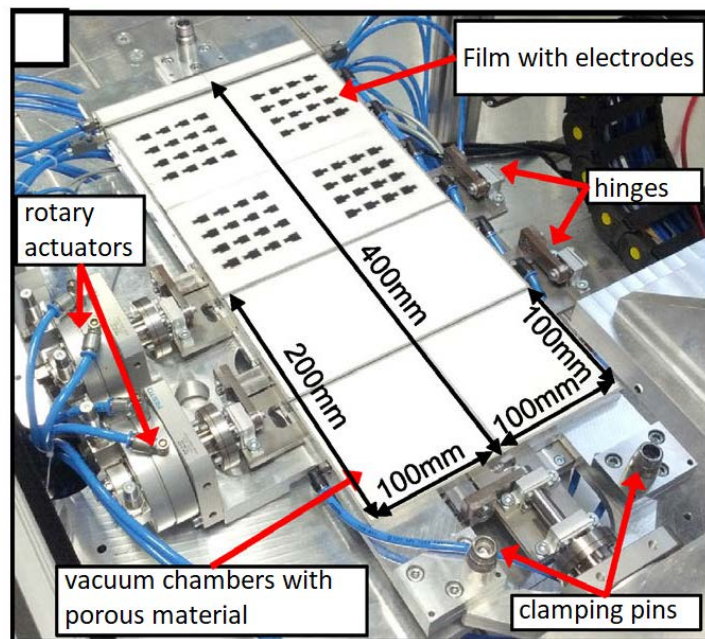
Vacuum folding table used to produce 8 layered actuators [29]
